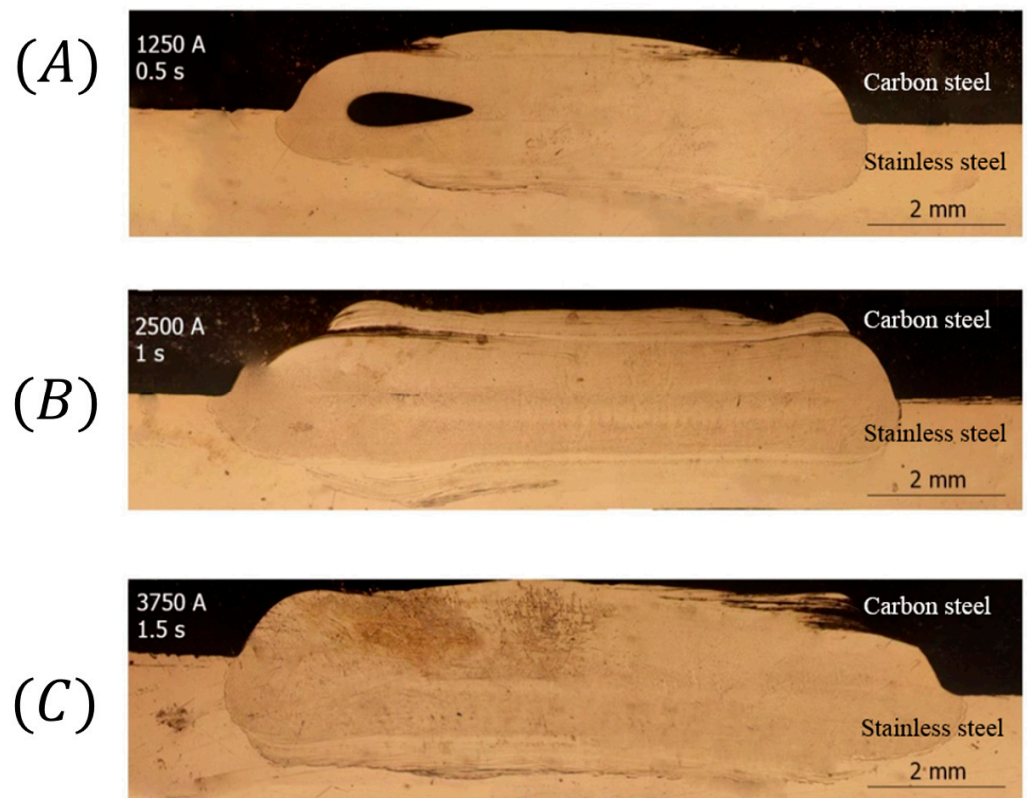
Macrostructure of the welding zone of dissimilar welding of 304 steel to carbon steel in different current and time conditions. (A) 1250 A and 0.5 s, (B) 2500 A and 1 s, (C) 3750 and 1.5 s.
